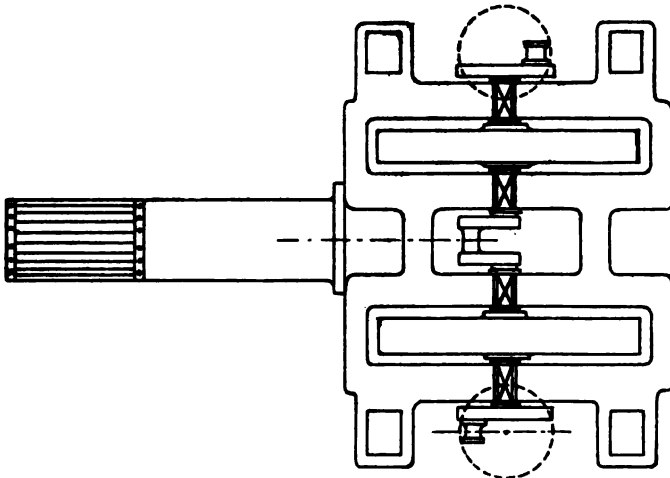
MACHINE WITH TWO INSIDE FLY-WHEELS.
